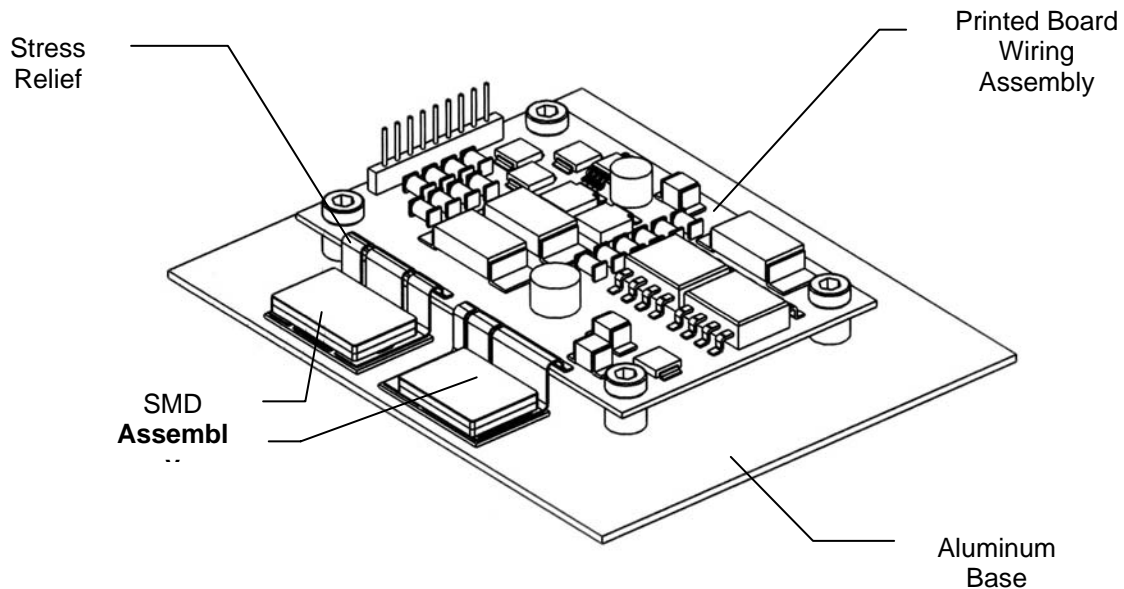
An Assembly Integration Using SMD Carrier Assemblies
